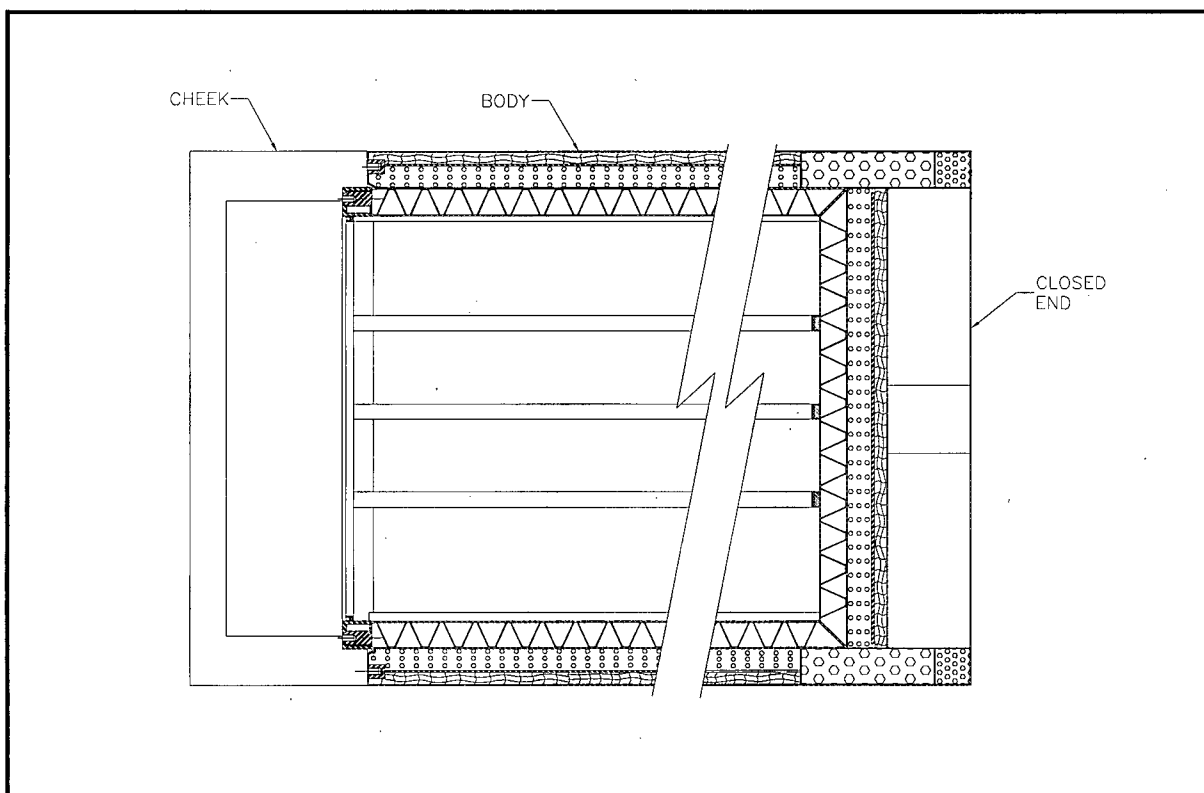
TRUPACT-III Packaging Body Cross-Section
